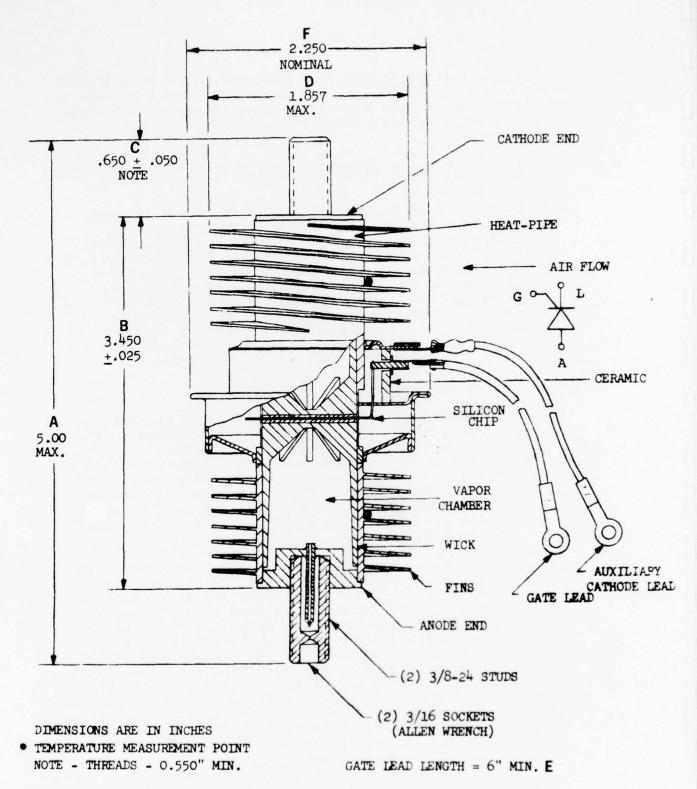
Transcalent Thyristor Type J-15371 Cross-Section Drawing
